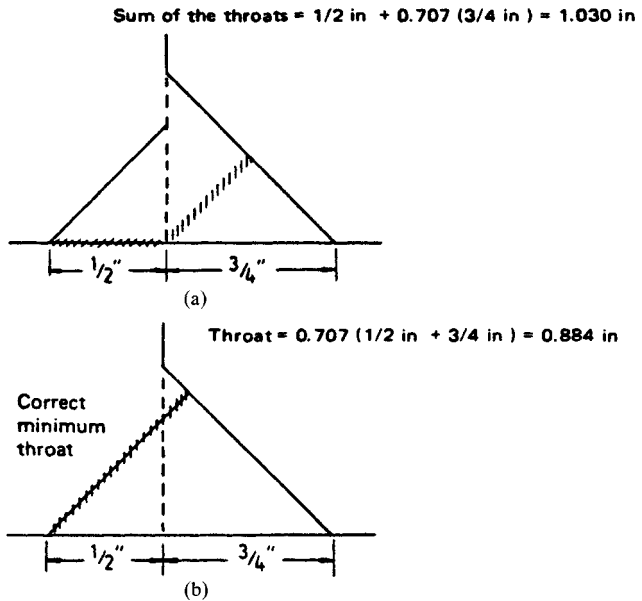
Examples showing the effect of correct and incorrect throat dimension in determining the allowable load on a combination weld. (a) The weld allowable load would be incorrectly figured by adding each weld throat separately; (b) weld allowable load is correctly figured using the minimum throat. (*The Lincoln Electric Company.*)
